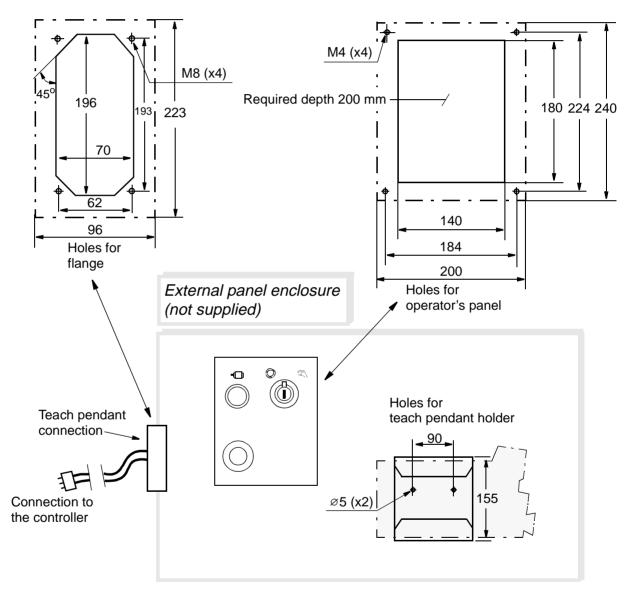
Required preparation of external panel enclosure (all dimensions in mm).
